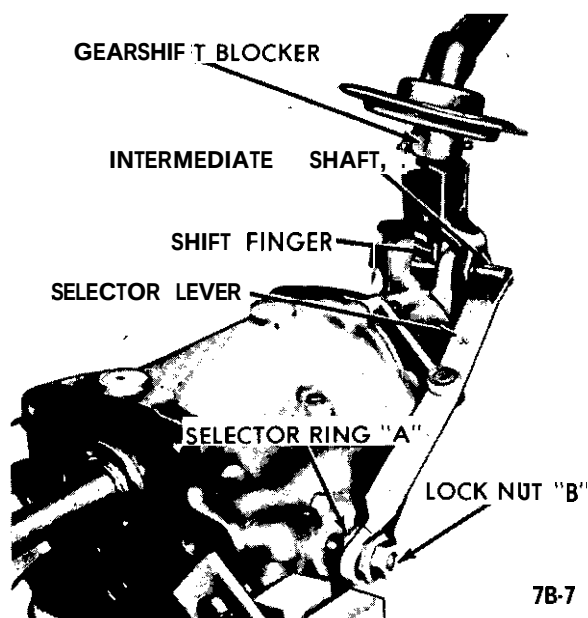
B-7 Reverse Gearshift Blocker Adjustment
